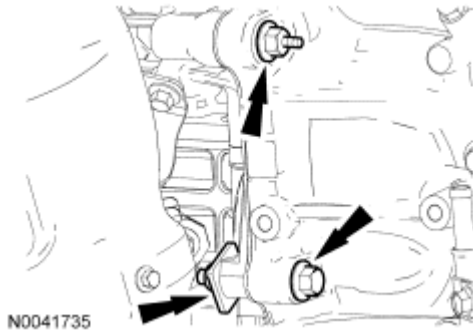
Locating Transaxle-To-Engine Stud Bolt, Bolt And Nut
